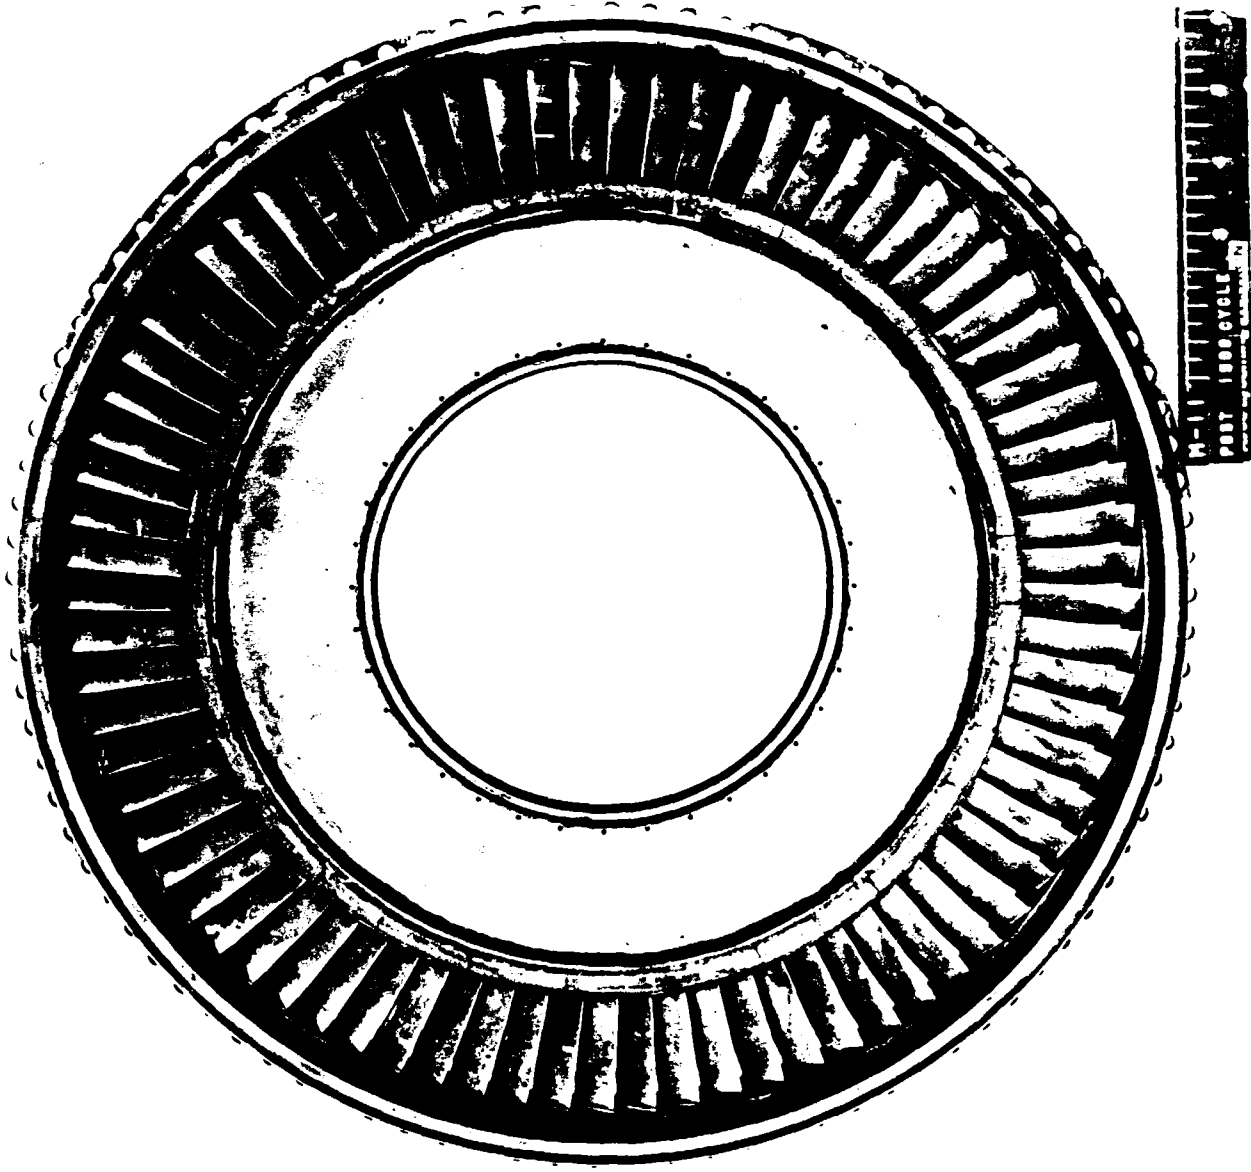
Second Nozzle, Rear, Inner Shroud Cracking,
